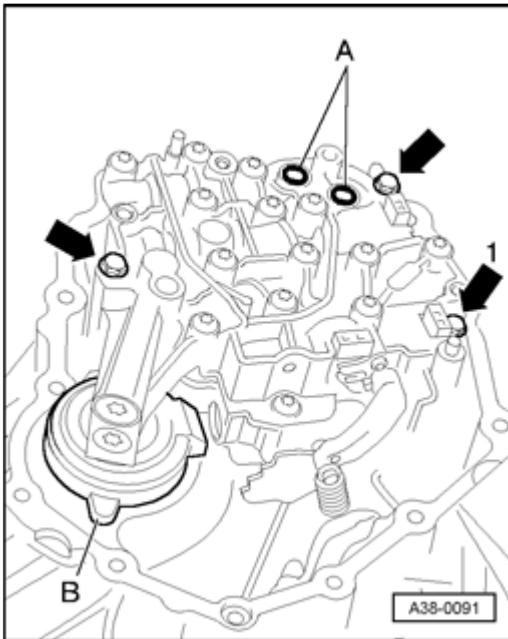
Coating New O-Rings On Hydraulic Control Module With ATF
